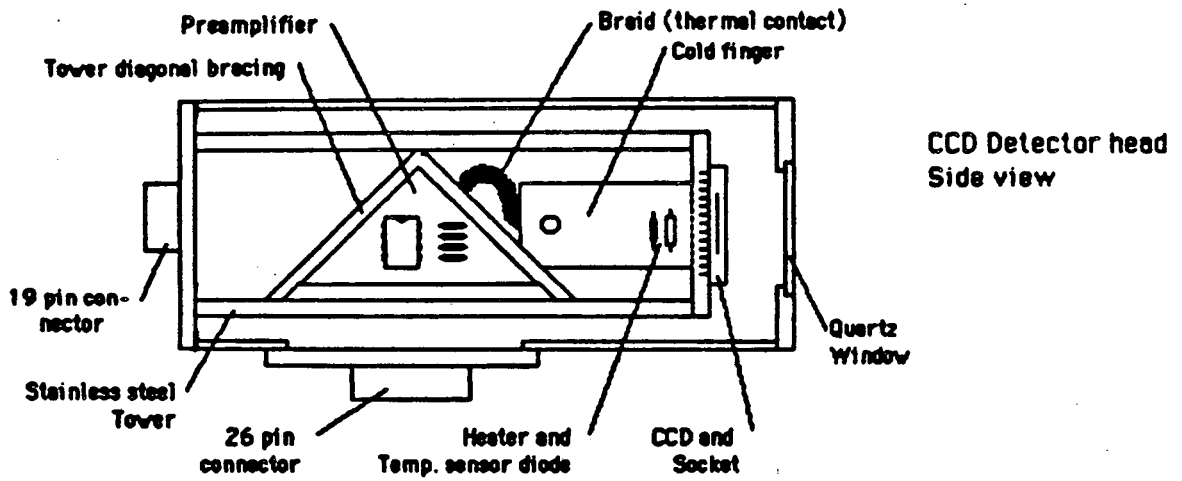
CCD vacuum housing and Dewar assembly
